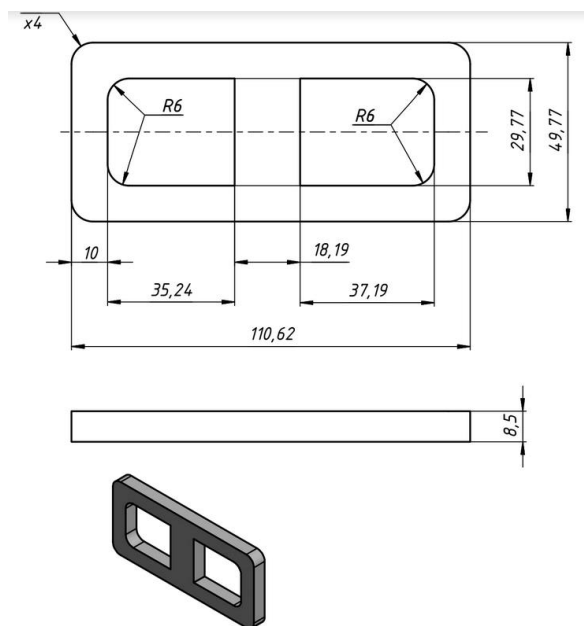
Technical drawing of the skin-on-a-chip support (leg)
